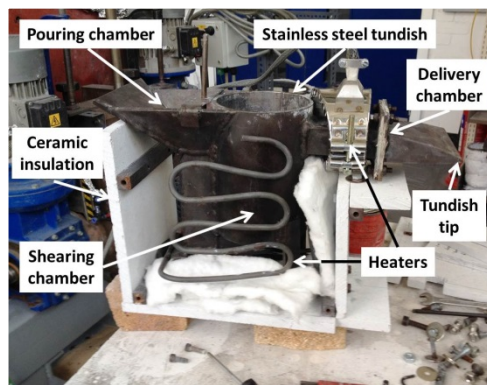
Prototype of in-house made steel tundish and equipped with heating elements for thermal control.
